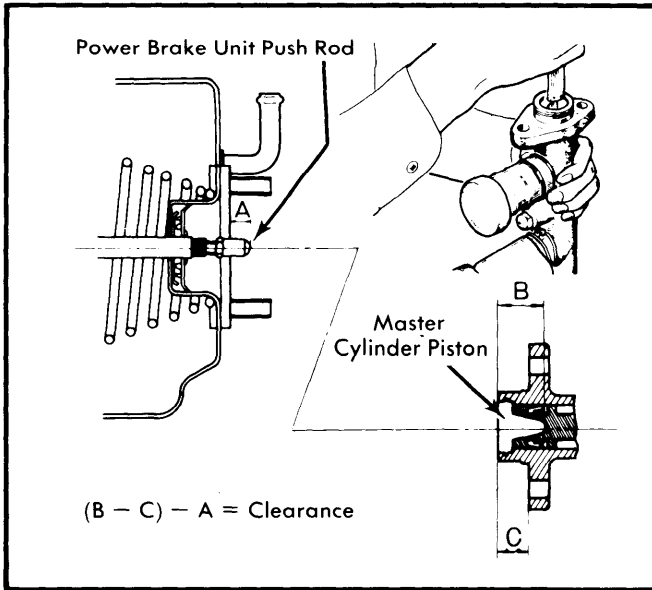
Locations for Measuring Master Cylinder Rod-to-Piston Clearance
